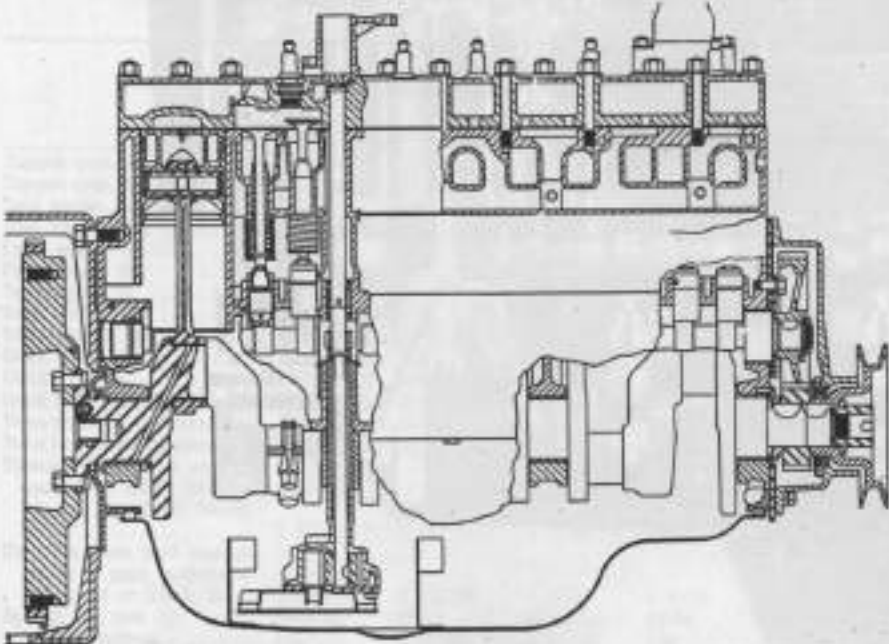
B—Continental A244-F226 six cylinder engine cross section. These models have a 4 bearing crankshaft.
